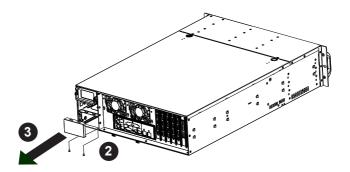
Removing the Dummy Drive from the Hard Drive Bay
